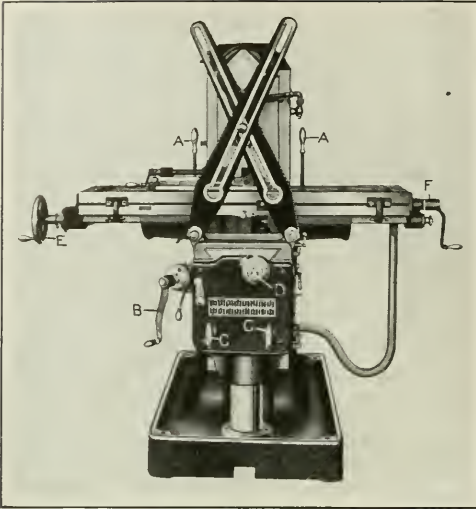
Front View of the Machine, illustrating the Arrangement of the Arbor Supports
